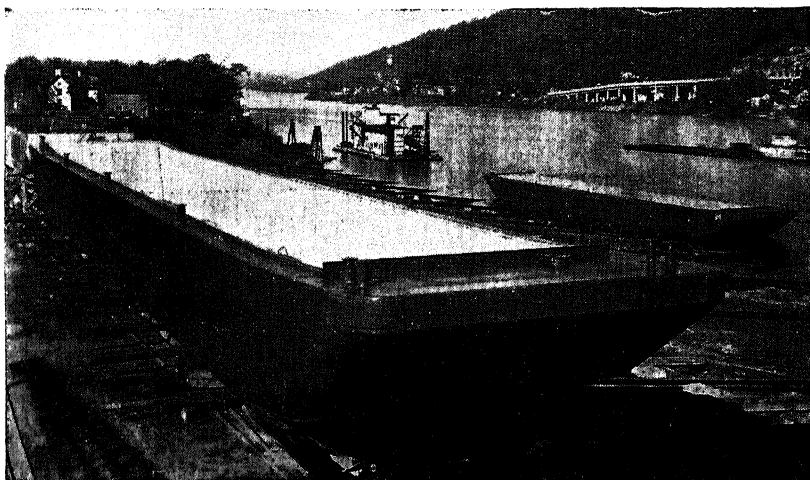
Coal barge of all welded steel construction ready for launching. Dimensions: 175 ft. x 26 ft. x 10 ft. 8 in.
